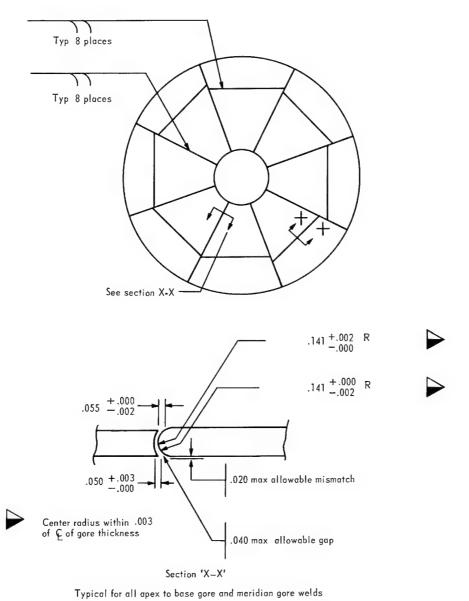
Thirty-three-foot diameter welded bulkhead showing apex gore and base gore horizontal welds and meridian welds.
